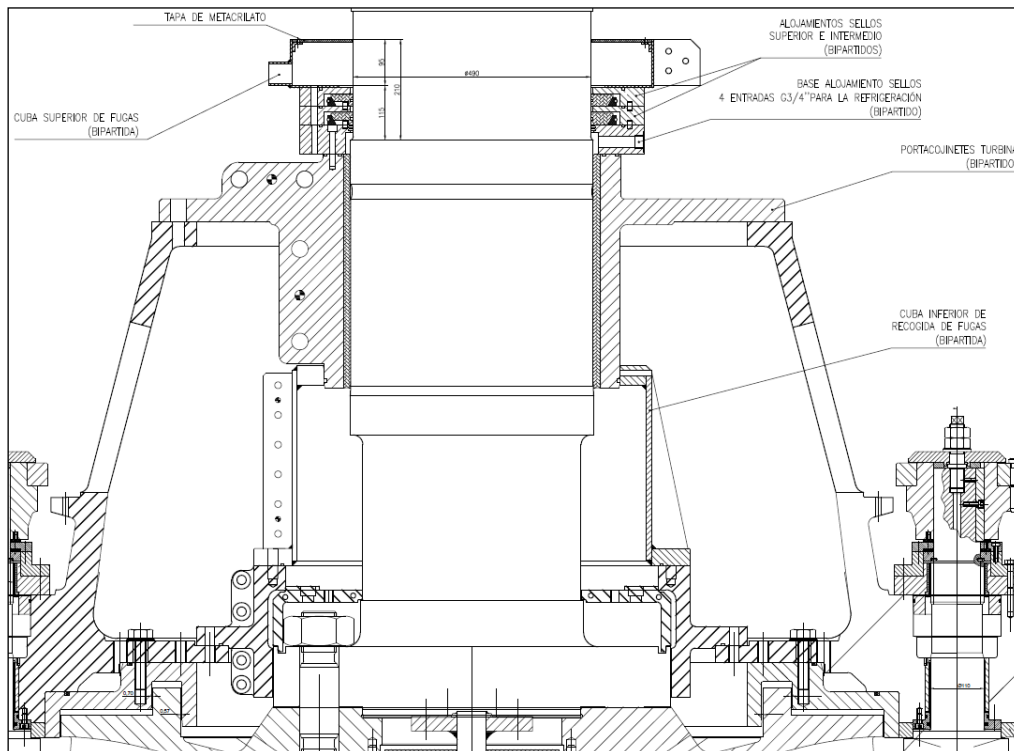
Implemented Design (Drawing provided courtesy of local workshop - Milsa Trillo S.A.)
